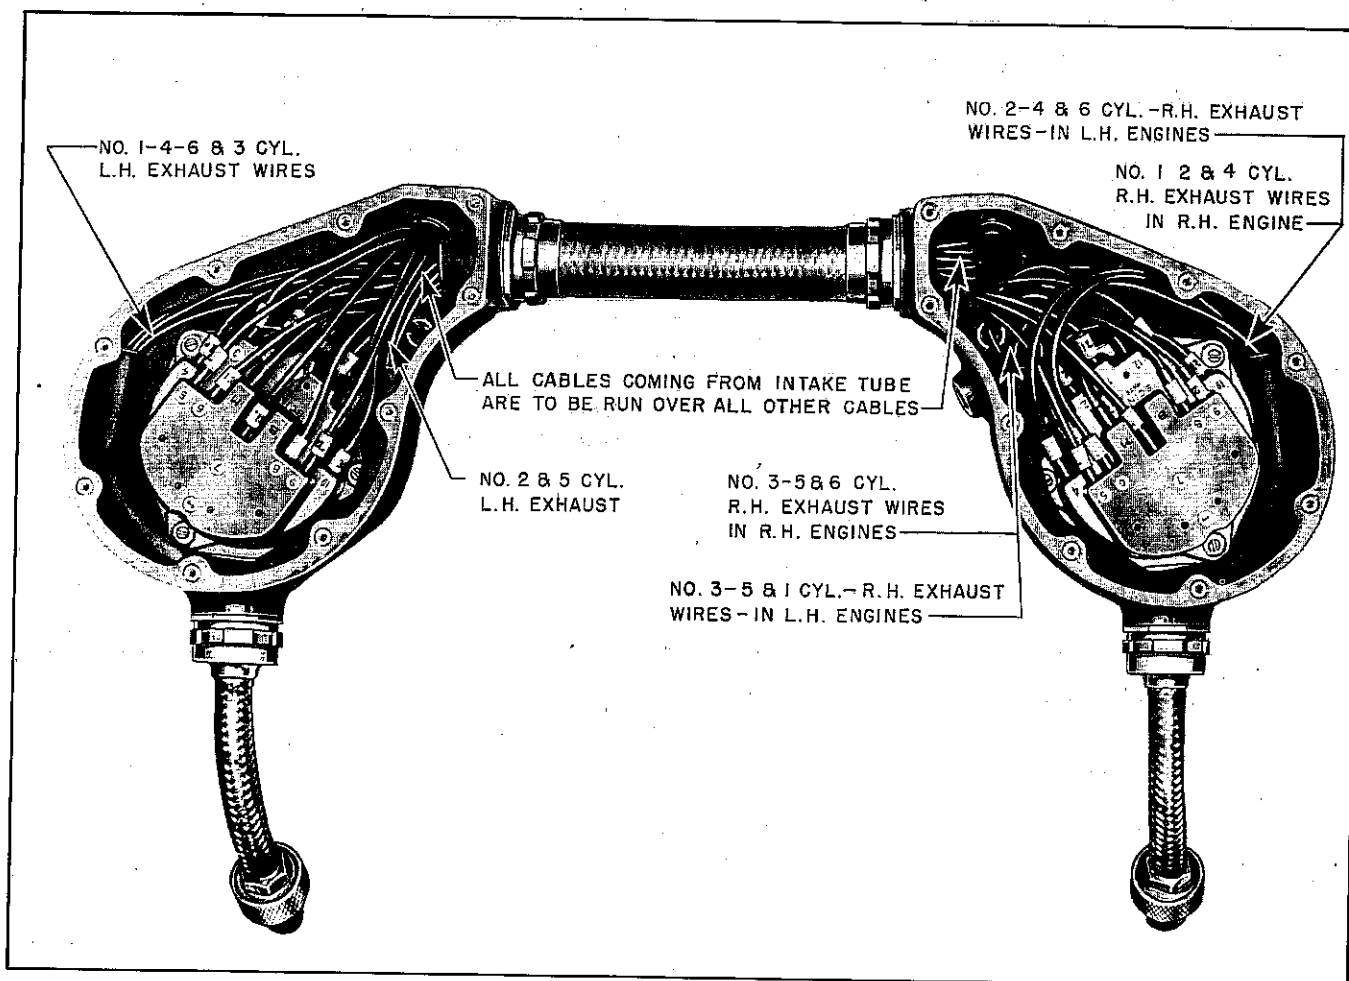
Method of Threading Ignition Cables to Distributor Head Connections.
